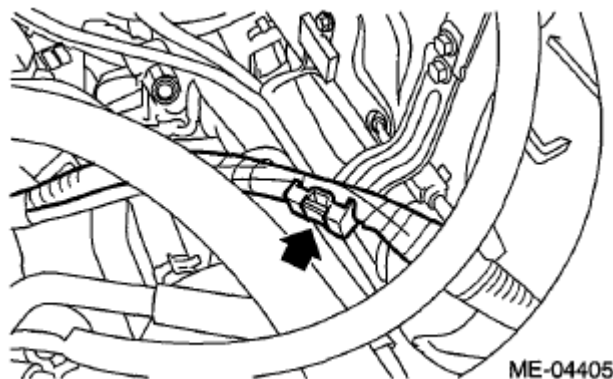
Locating Starter Harness And Engine Ground Bracket
